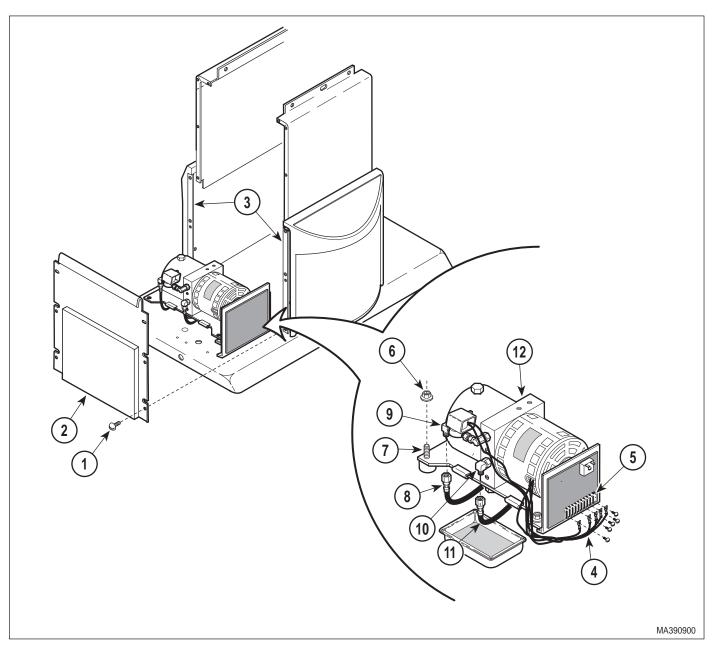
Motor Pump Assembly - Complete Removal / Installation
